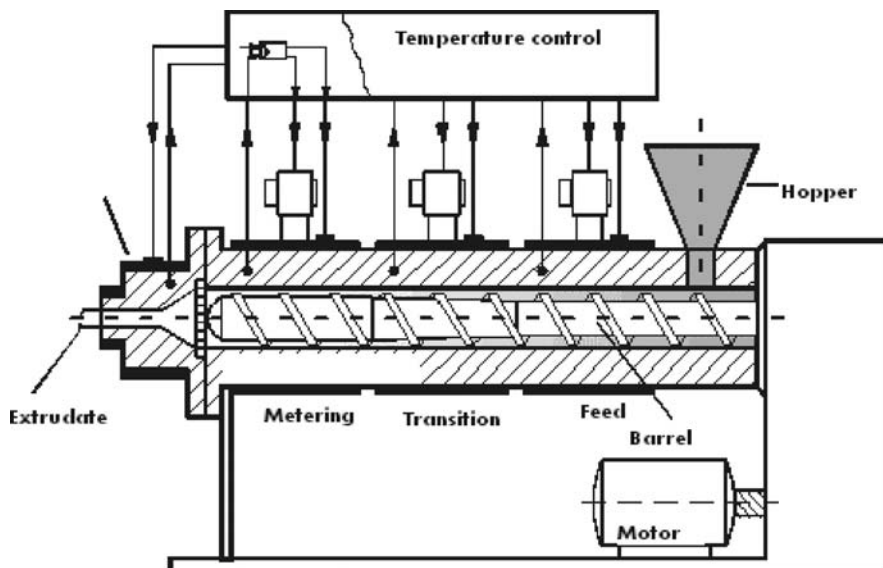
Schematic drawing of a single screw extruder (adapted from www-rt.uni-paderborn.de/)
